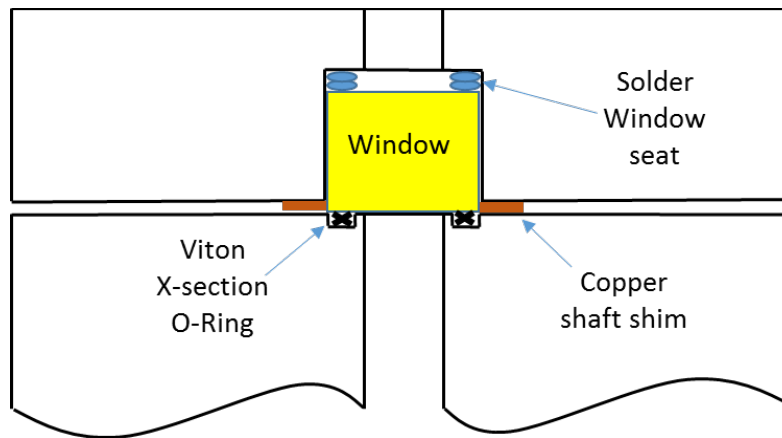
Schematic of window end of the assembled chamber with machine screws (not indicated) torqued to 20 lb-in. Compression of the solder window seat and X-section O-ring is not to scale.
